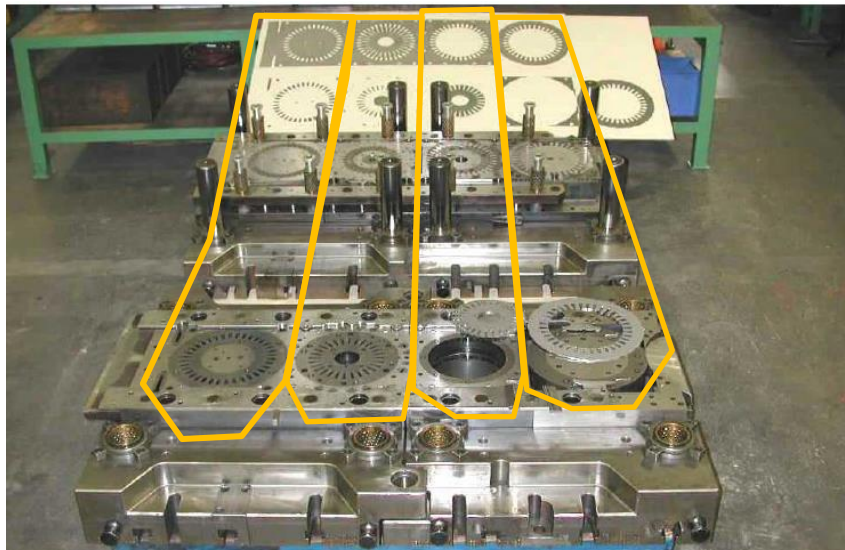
A four stage stamping tool for stator and rotor lamination production (Klocke, 2005, p. 23)
